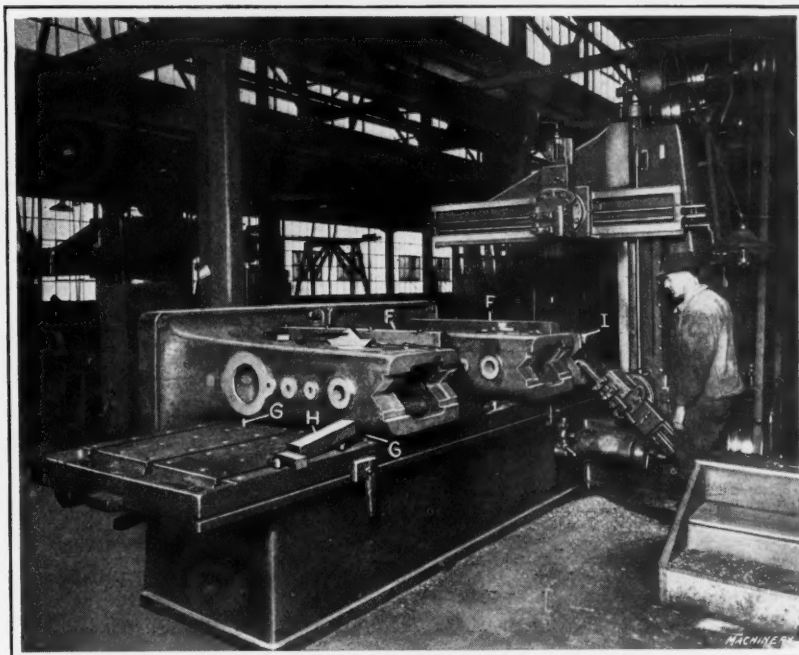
Open-side Planer equipped for planing Over-arm Bearing in Two Milling Machines
